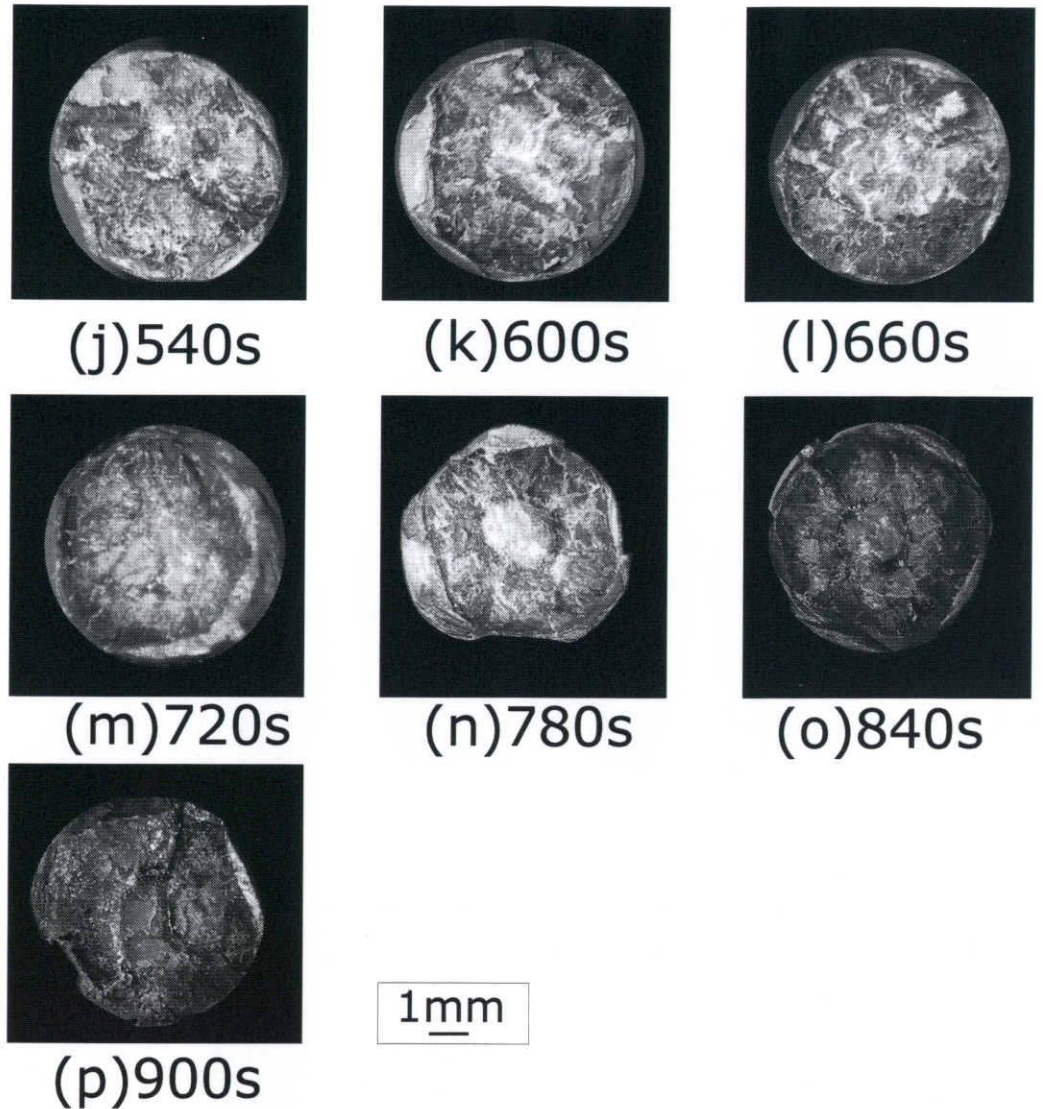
Fracture surface of specimen by Al/Cu/Al;
